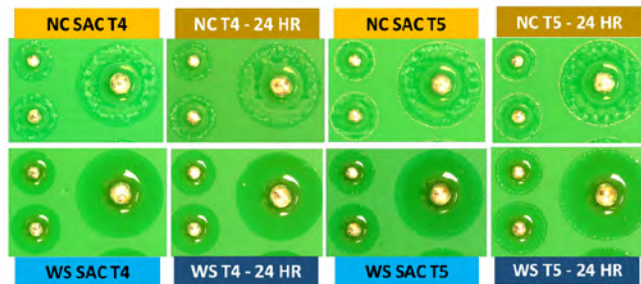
Solder balling of solder pastes before and after 24-hour storage.
